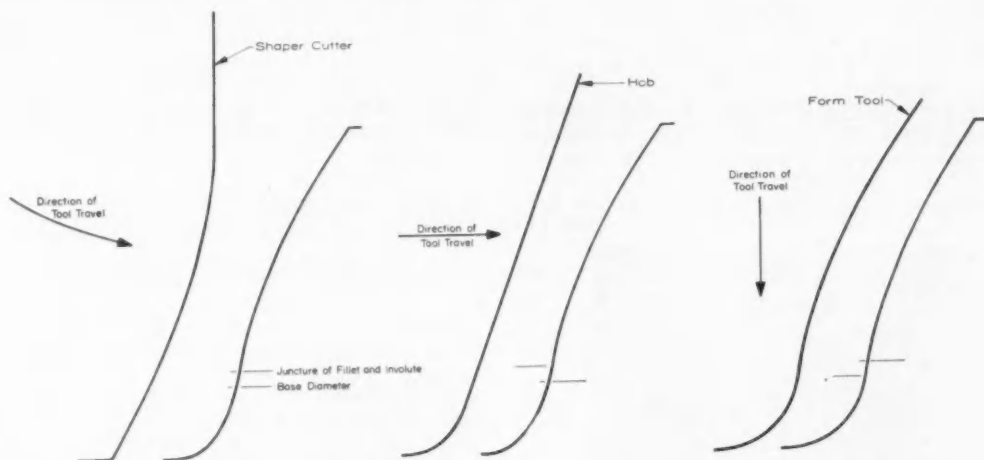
Condition on gear tooth when no fillet allowance is made for the shaving cutter.
